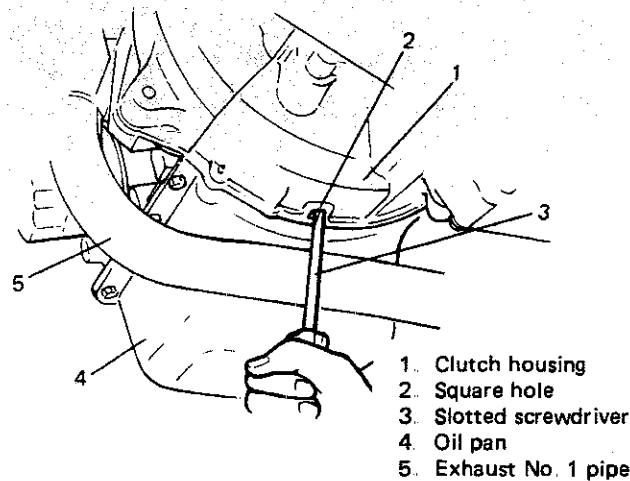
Positioning screwdriver through clutch housing bore. Manual transaxle
